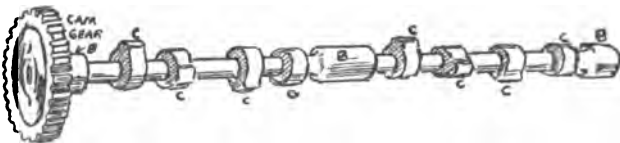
The cam shaft as used with a four cylinder, L-head type of cylinder. There is but one cam shaft in this type because all of the inlet and all of the exhaust valves are on the L-side of the cylinder—see fig. 5. There are eight cams on the cam shaft.
